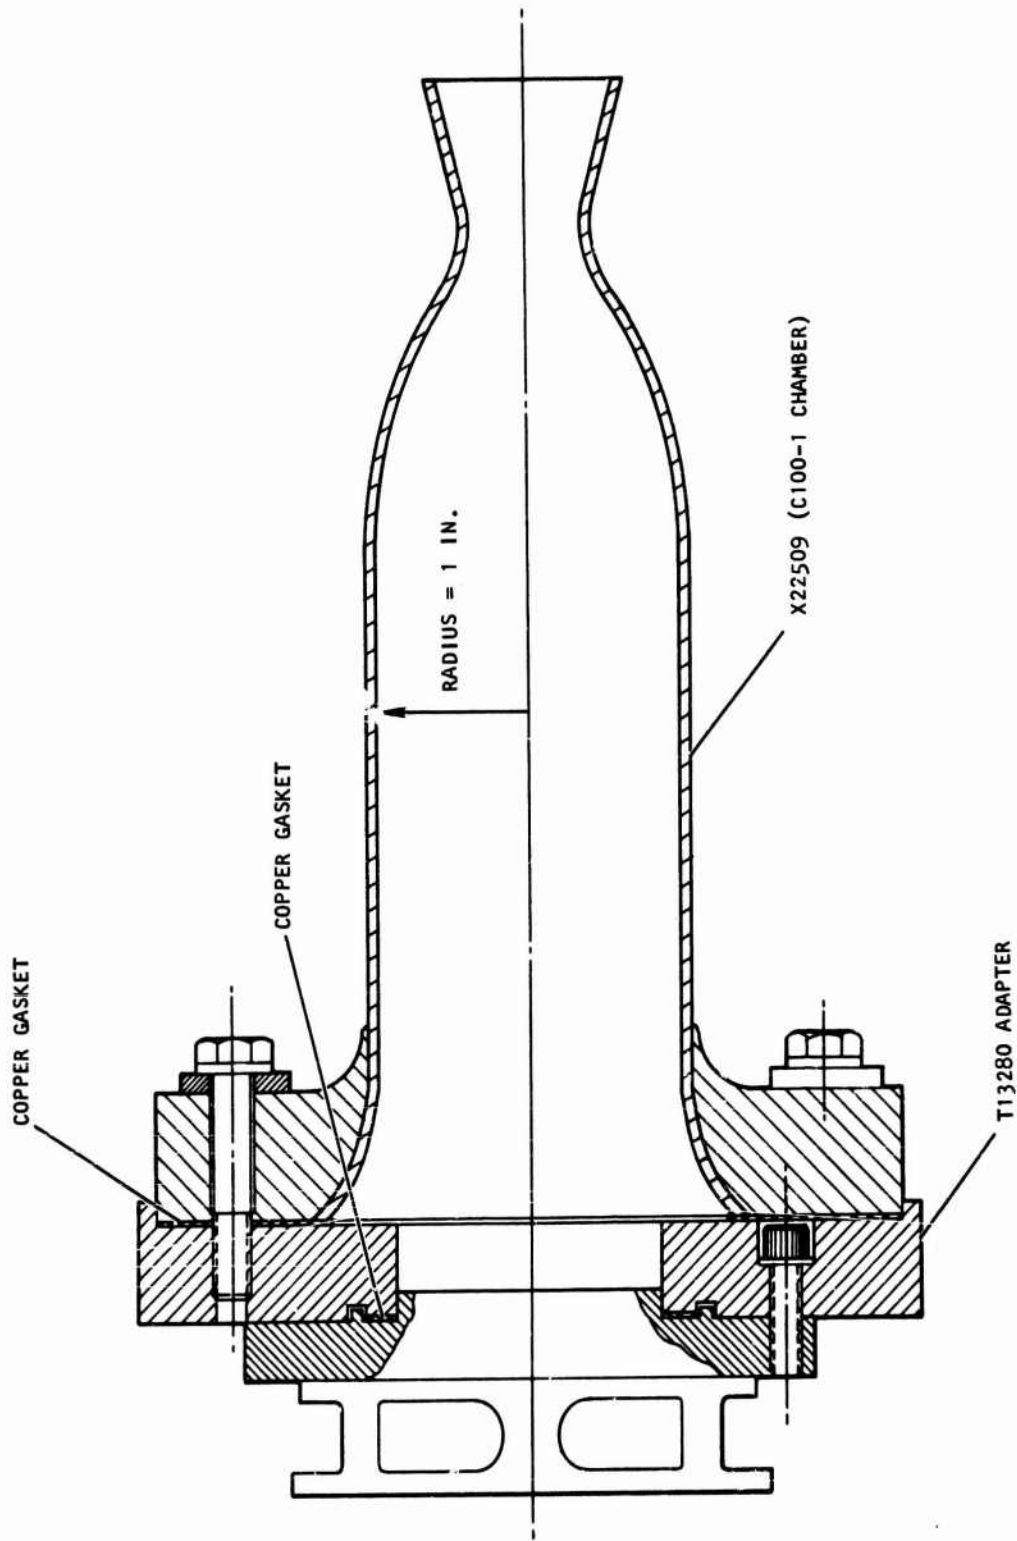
(U) Assembly of C100-1 Chamber Engine
